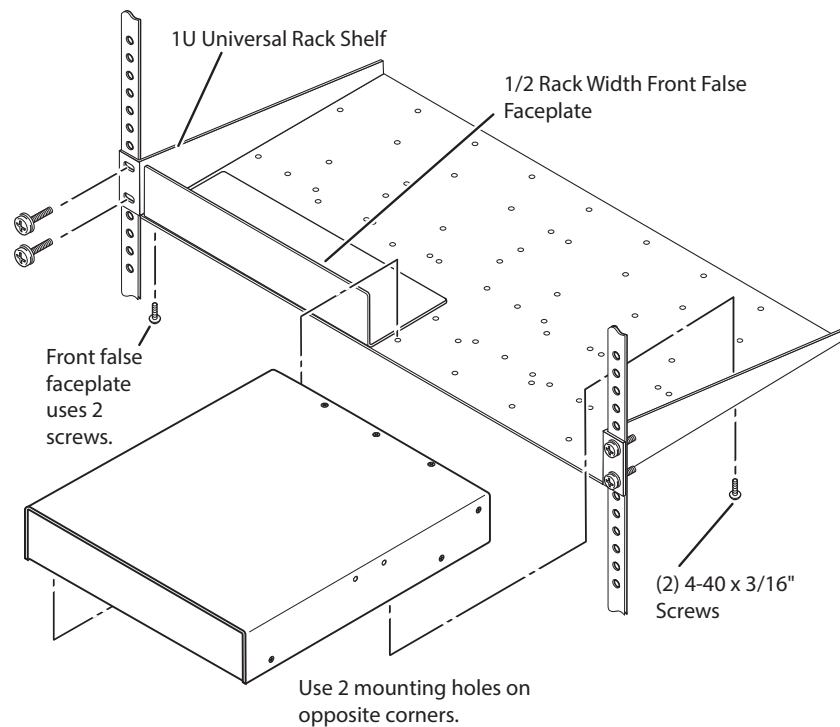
Mounting the NetPA AT on a Universal Rack Shelf
